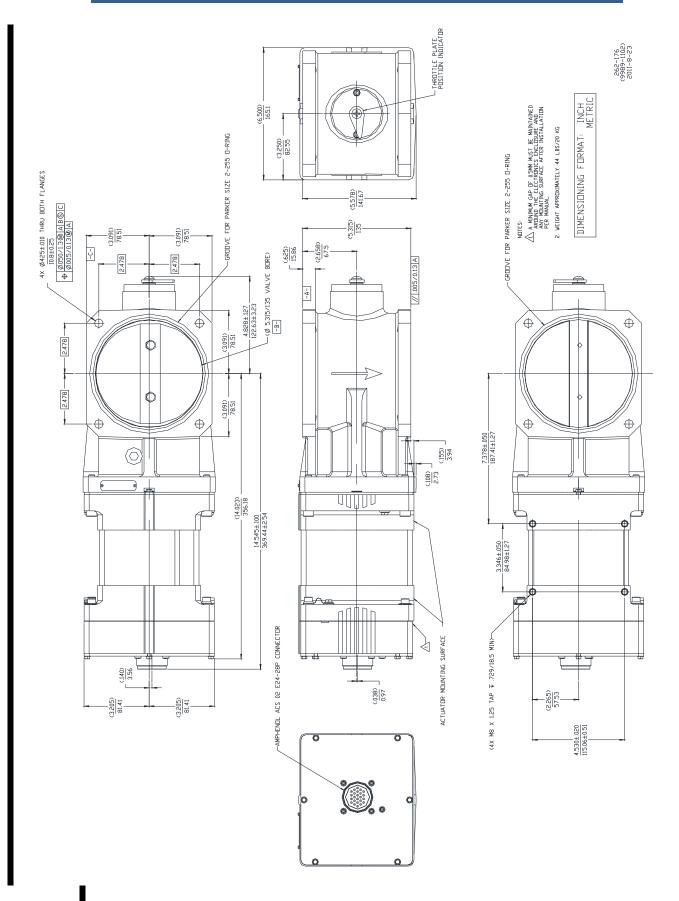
Outline Drawing of PISC III ITB 135 mm
